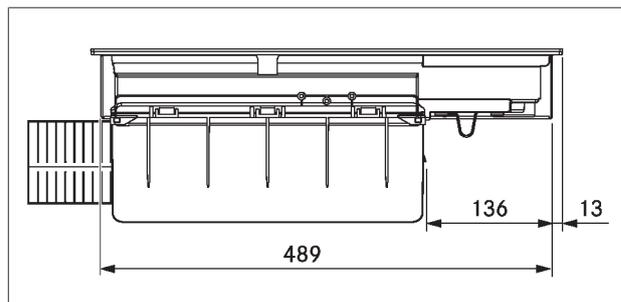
CKA2/CKA2AB appliance dimensions side view
